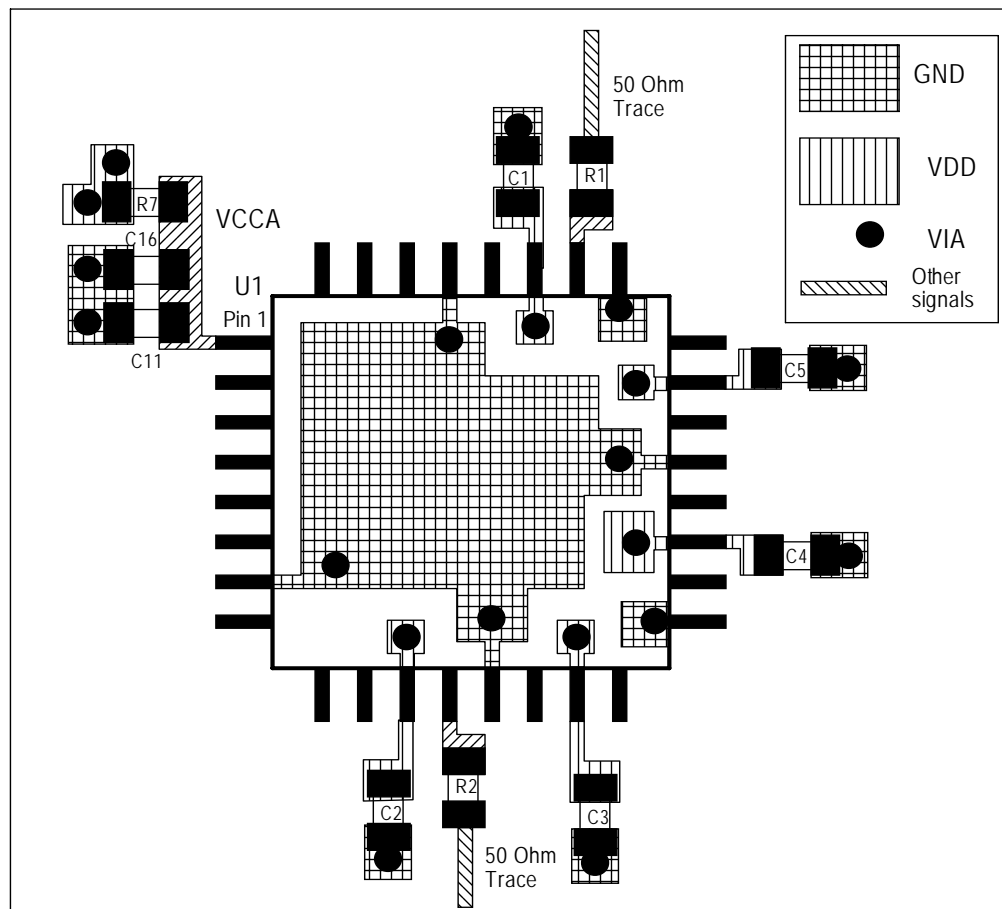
B. PCB BOARD LAYOUT FOR ICS86953I-147
